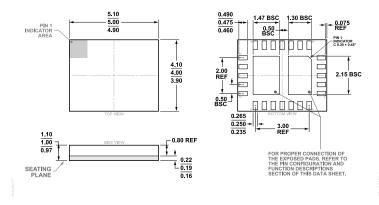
24-Lead Land Grid Array [LGA] 5 mm × 4 mm Body and 1 mm Package Height (CC-24-11) Dimensions shown in millimeters
